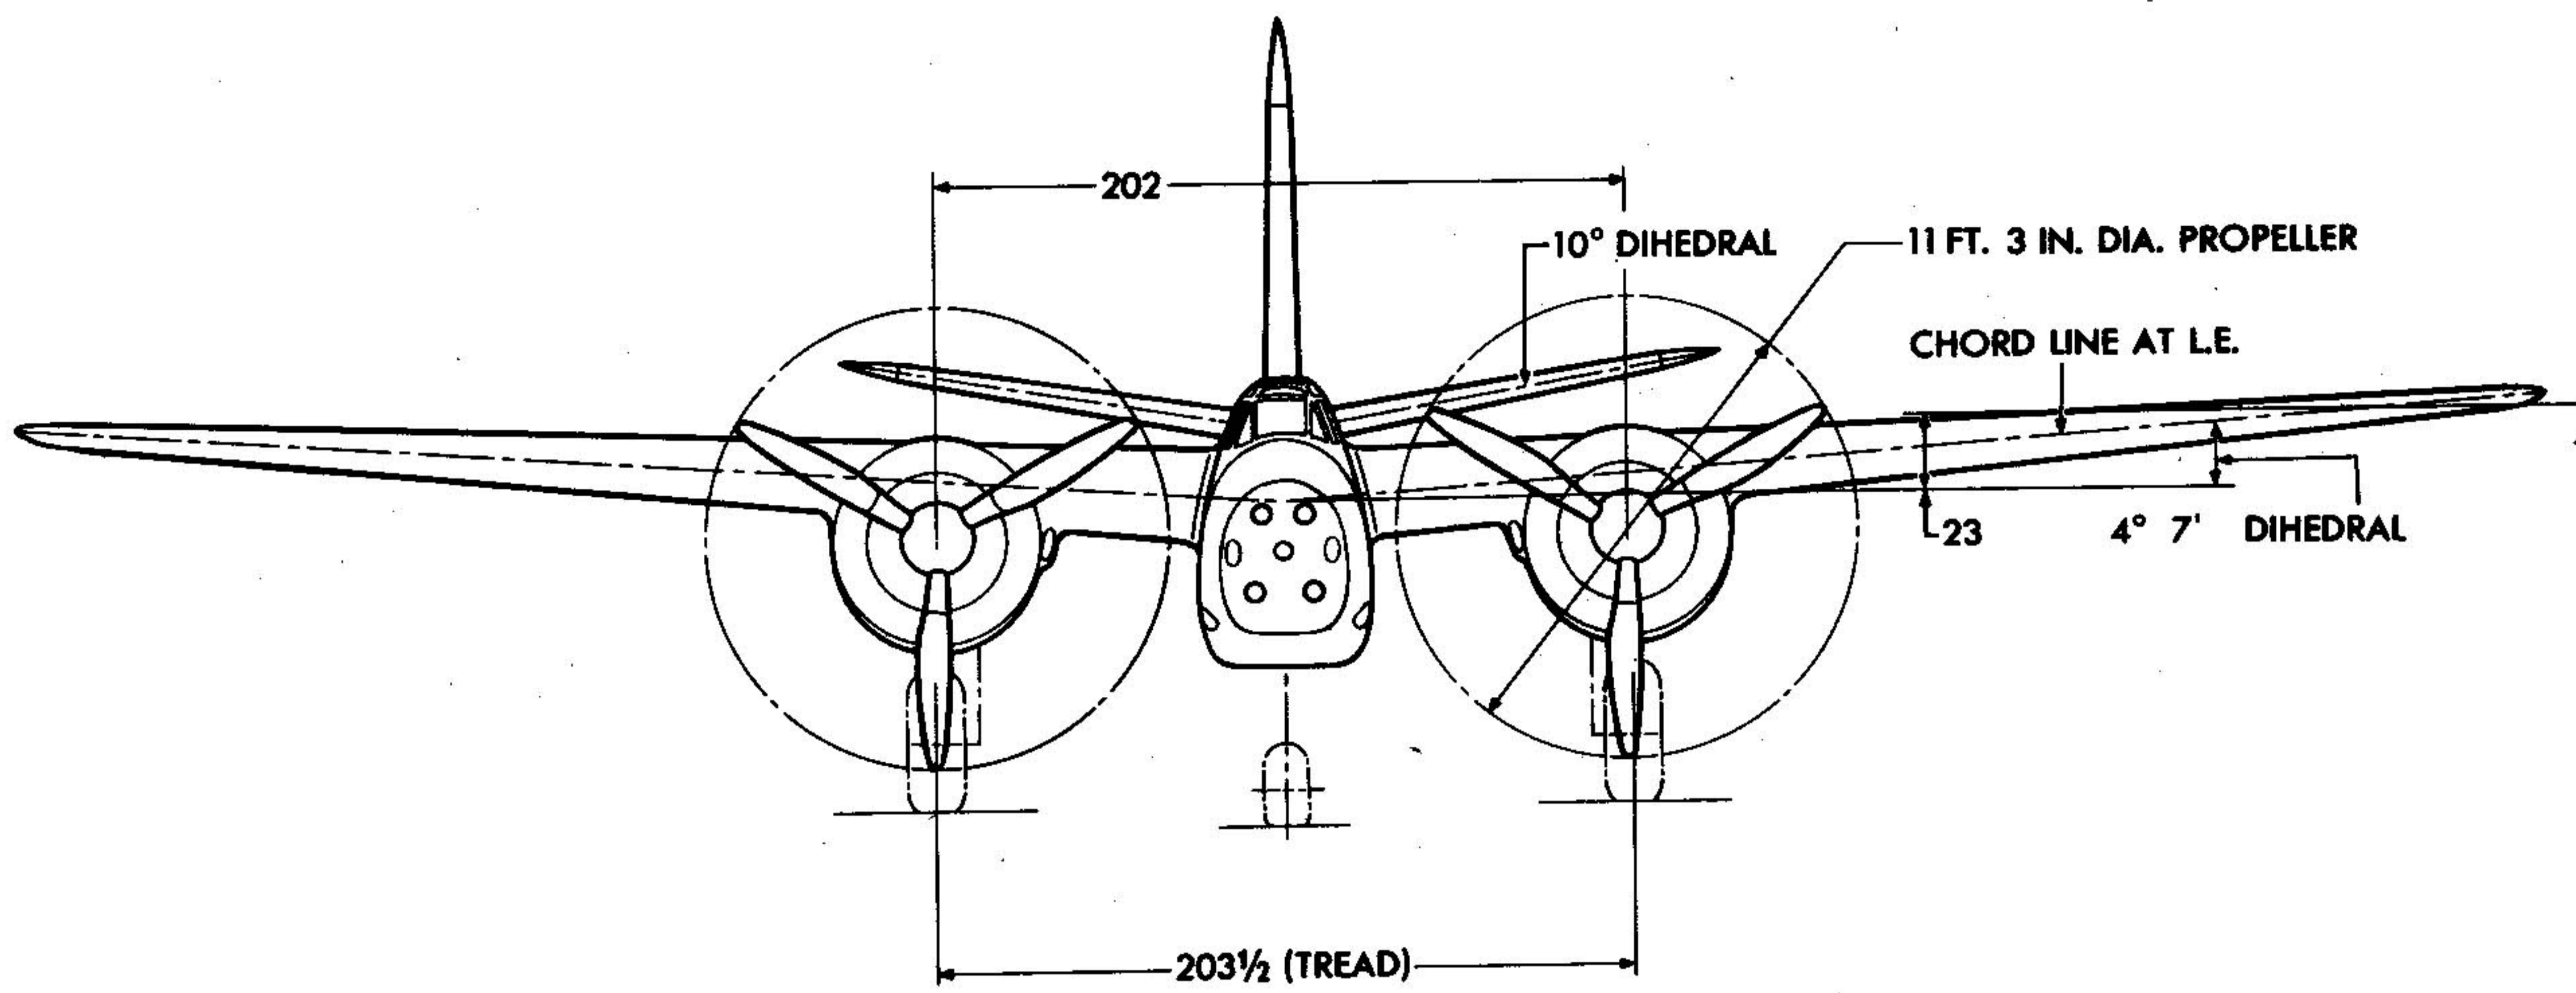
FRONT VIEW, SHOWING PRINCIPAL DIMENSIONS
